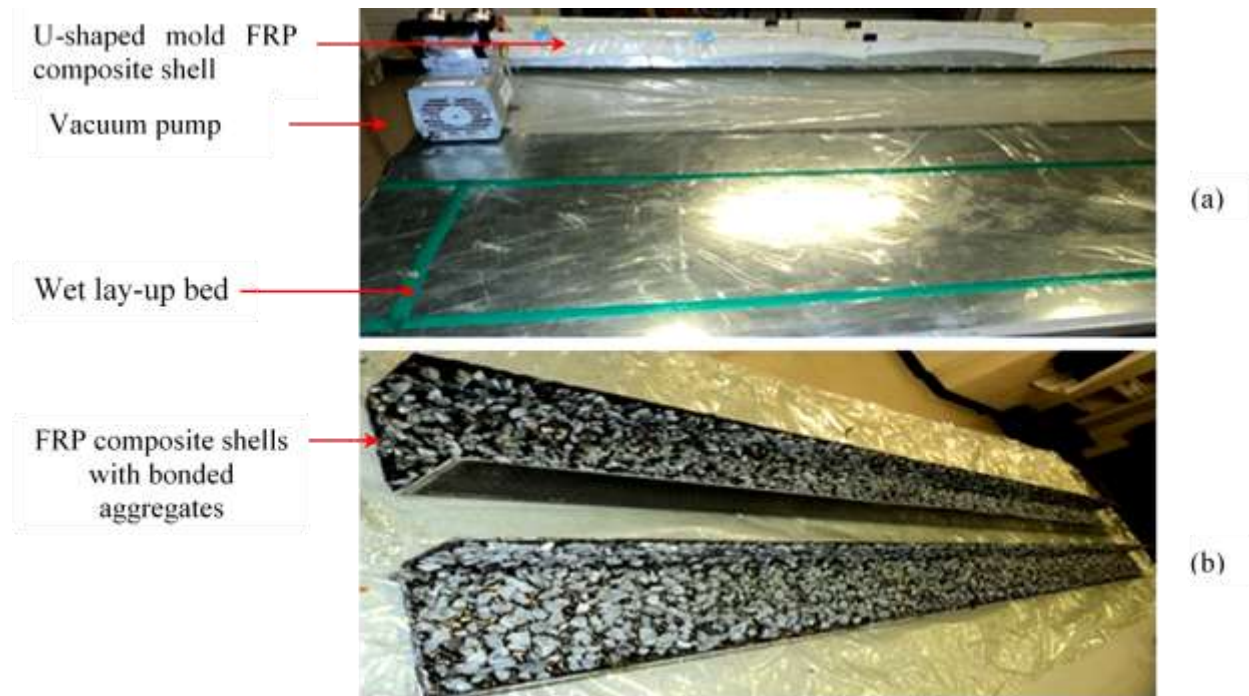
Preparation of FRP composite shell (a) vacuum hand molding wet lay-up setup (b) u-shape FRP composite shells with bonded aggregate.
